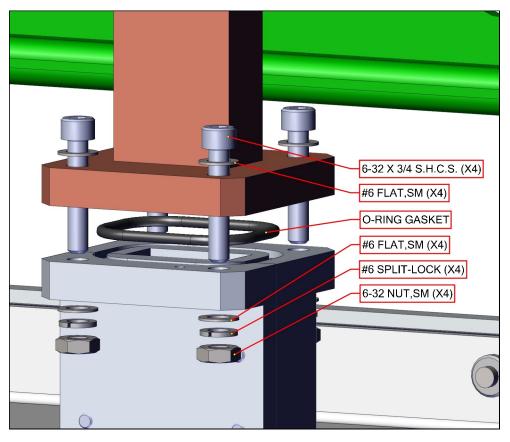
Insert O-Ring Gasket at HPA RF Output and Secure Waveguide to Flange
